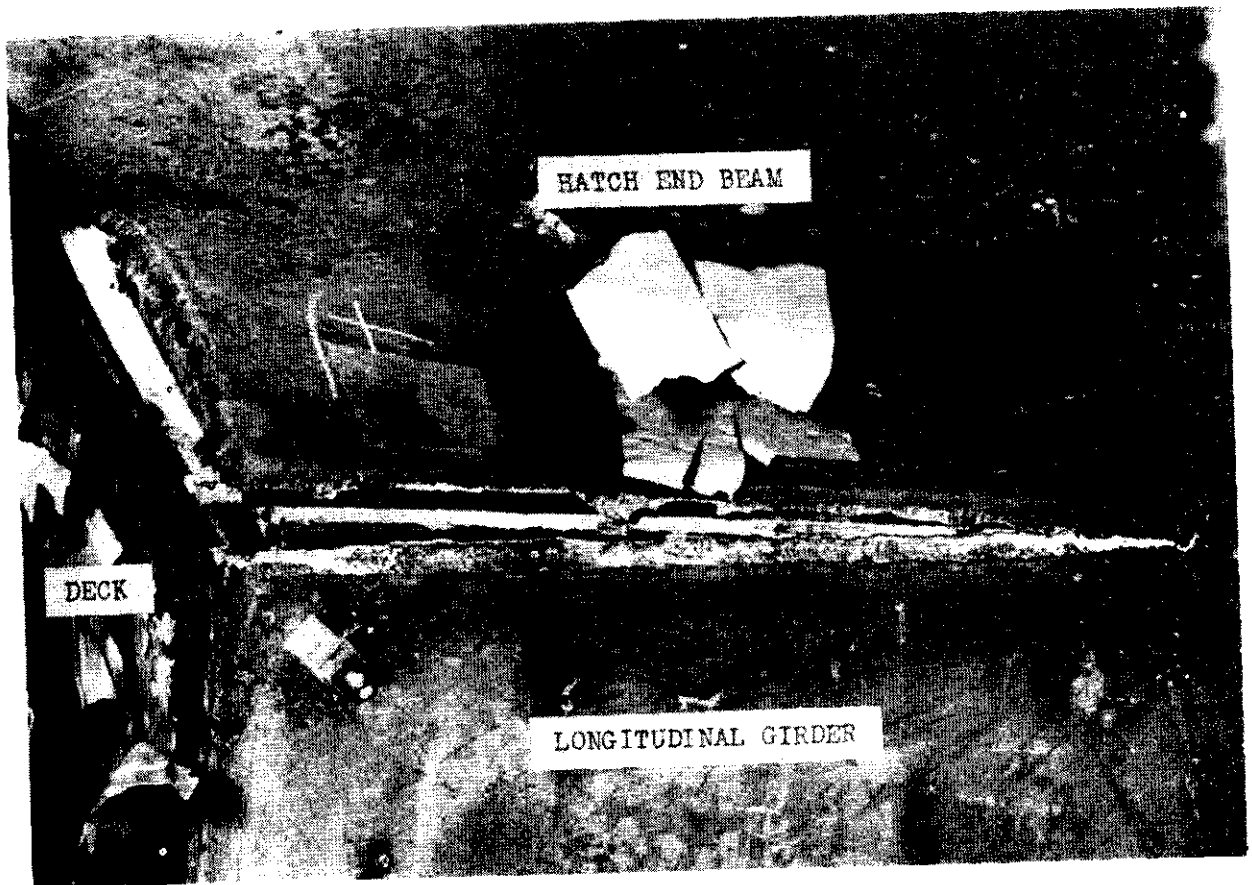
Specimen 4: View of fractures from below, outboard and forward of hatch end beam
